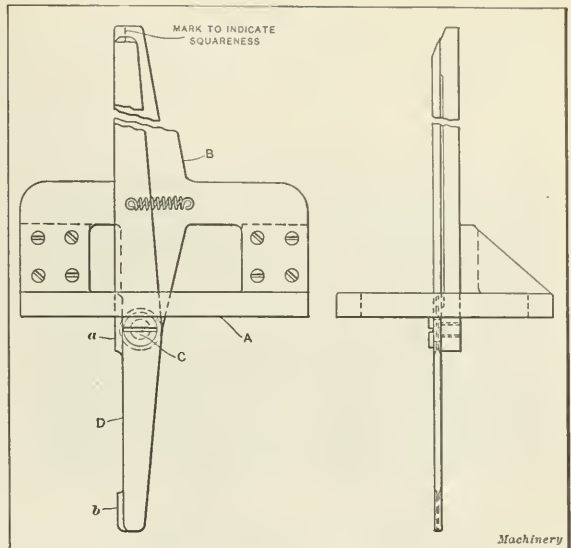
Indicating Gage for testing Squareness of Base of Cylinder Casting with Bore of Cylinder
